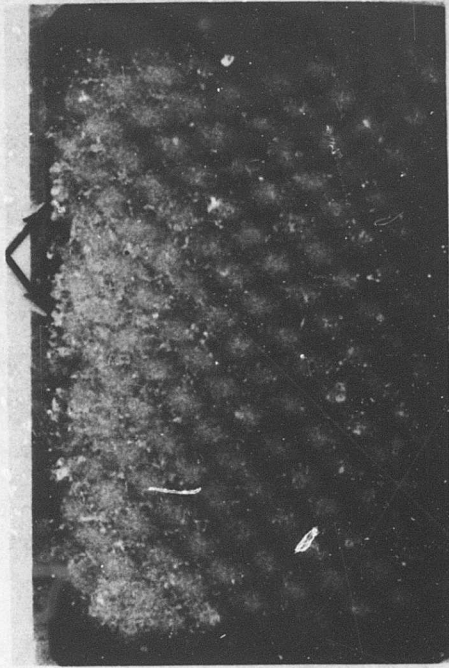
Typical Fatigue Fracture Surfaces (Arrows Indicate Origins of Failure).
